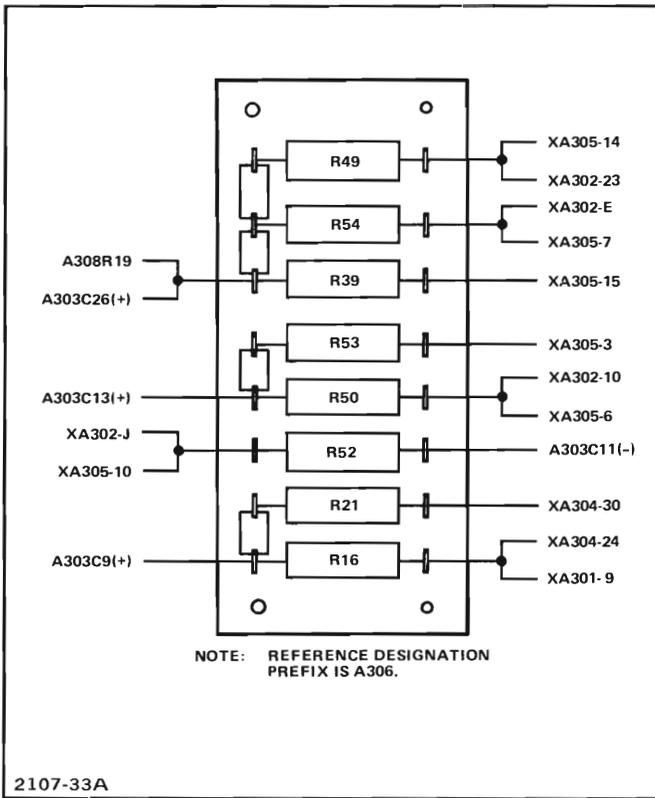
A306 Component Board Assembly (02116-63229), Parts Location and Connection Diagram
